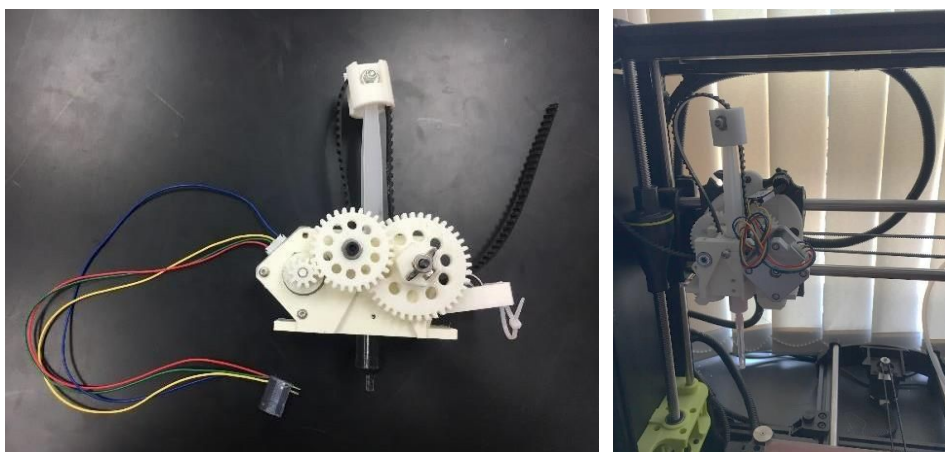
(left) Printed Universal Paste Extruder. Figure 4 (right) Printed Extruder on Printer.
